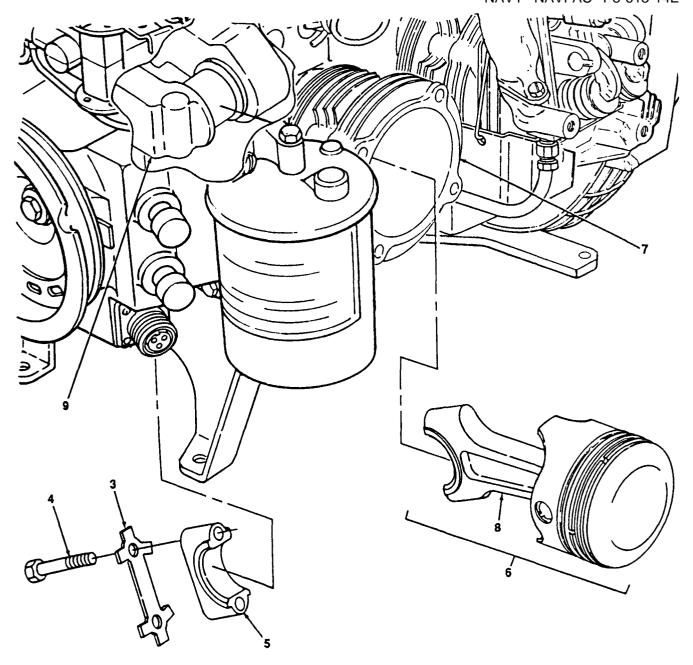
Piston and Connecting Rod Assembly, installation.
